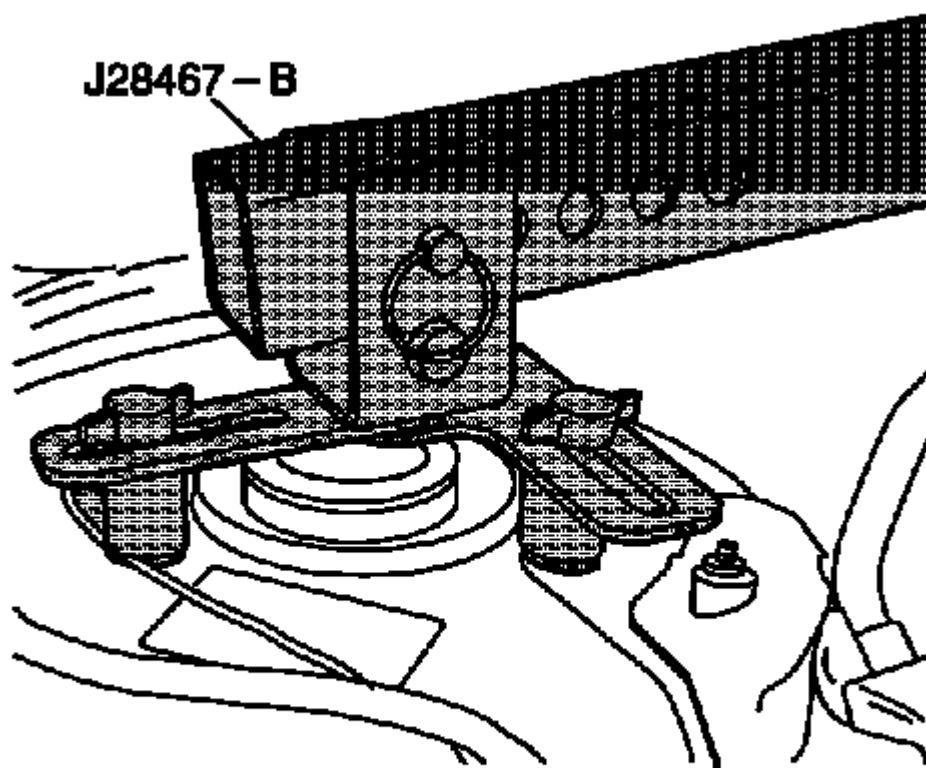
Identifying Engine Support Fixture (J 28467-B)
